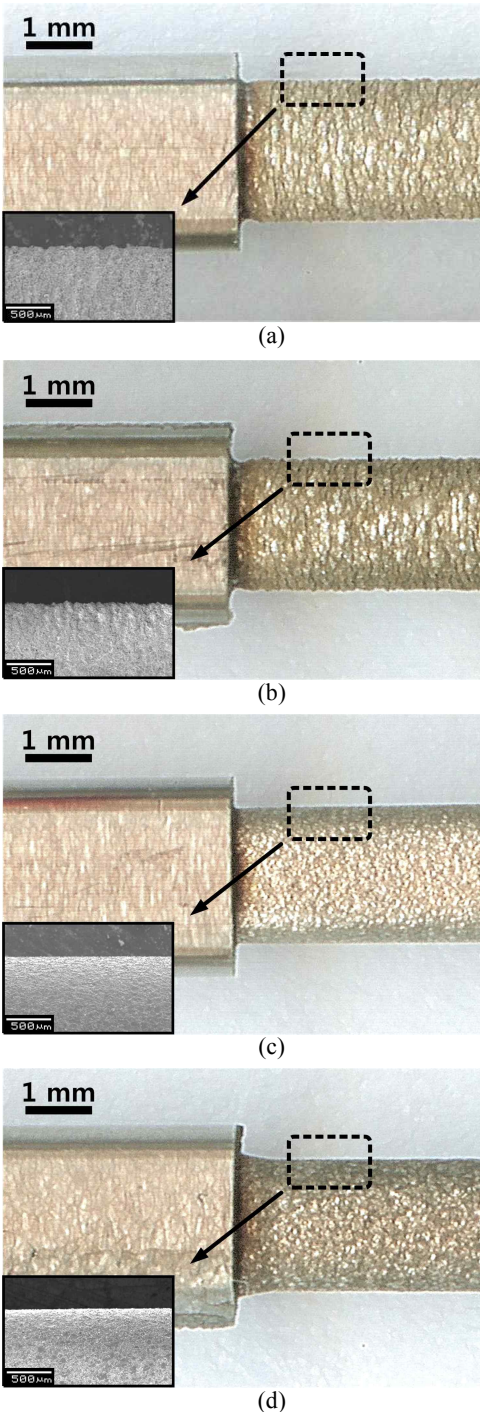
Machined shafts: (a) Wire-EDMed using 240 A, (b) Wire-EDMed using 270 A, (c) Strip-EDMed using 240 A, (d) Strip-EDMed using 270 A.
